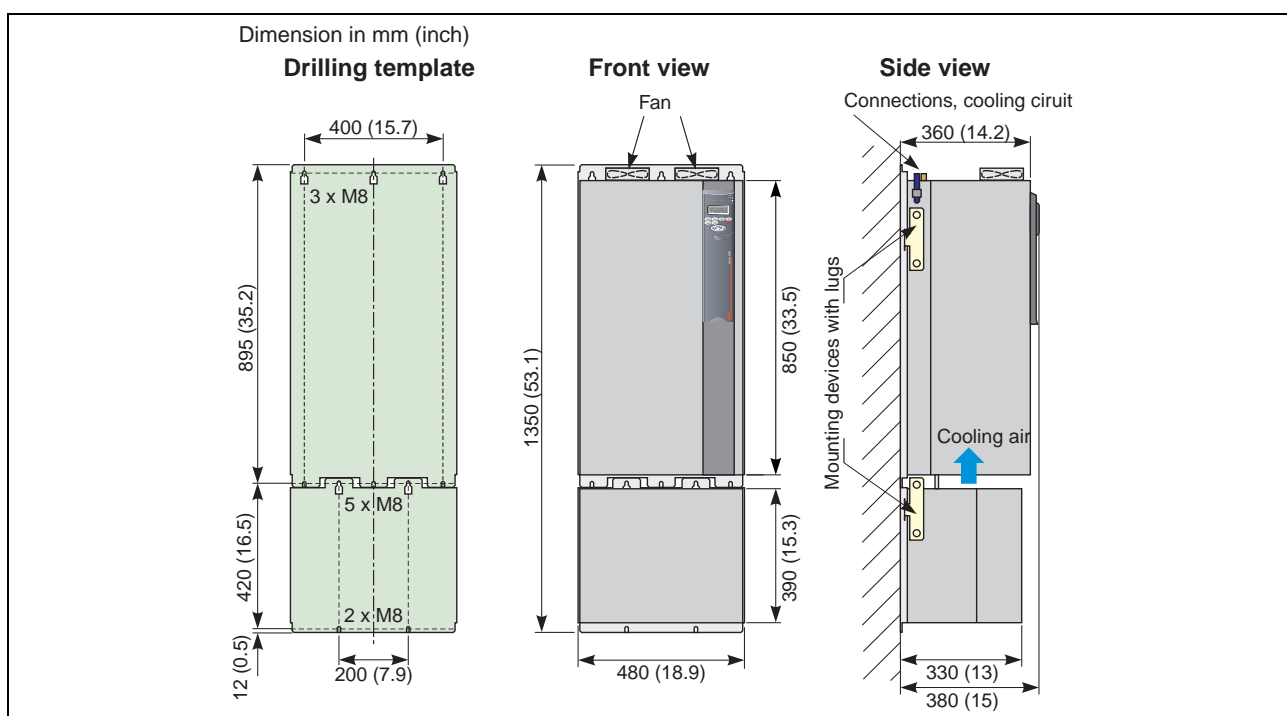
Dimension drawing converter size class G without heat exchanger
